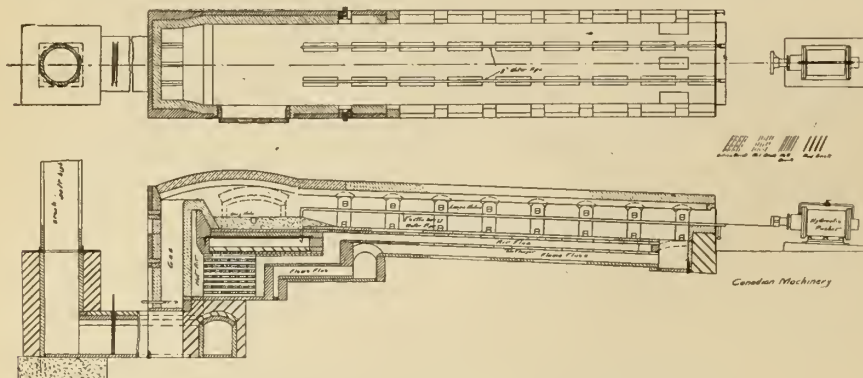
Continuous Heating Furnace in Rolling Mill.
